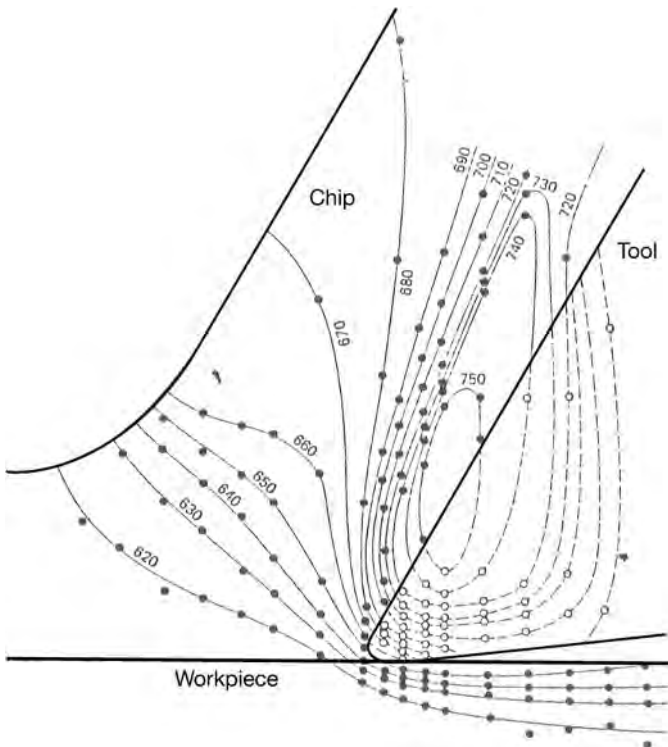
Temperature distribution in workpiece and tool in cutting of mild steel with a cutting speed of 23 m/min, width of cut 6.3 mm, rake angle 30° and relief angle 7° (after Boothroyd, 1963).
